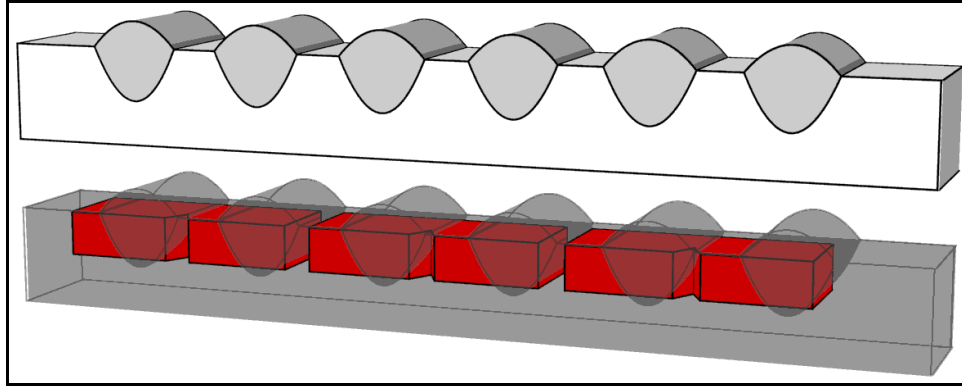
Schematic of SS-CVN Specimen Extraction from BOP Weld Coupons
